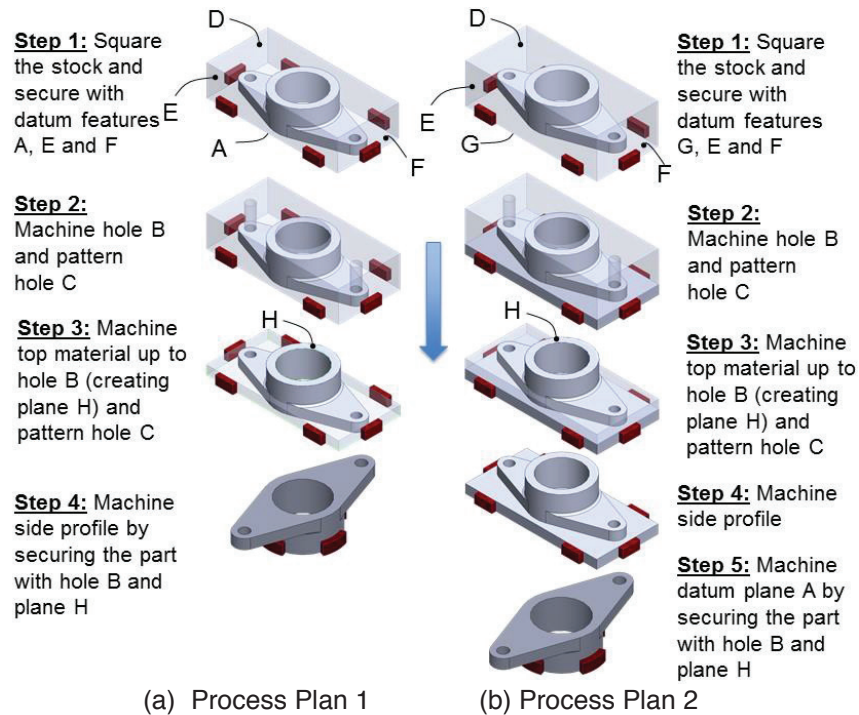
Steps and additional datum feature in a Process plan for machining the part shown in Figure 3.
